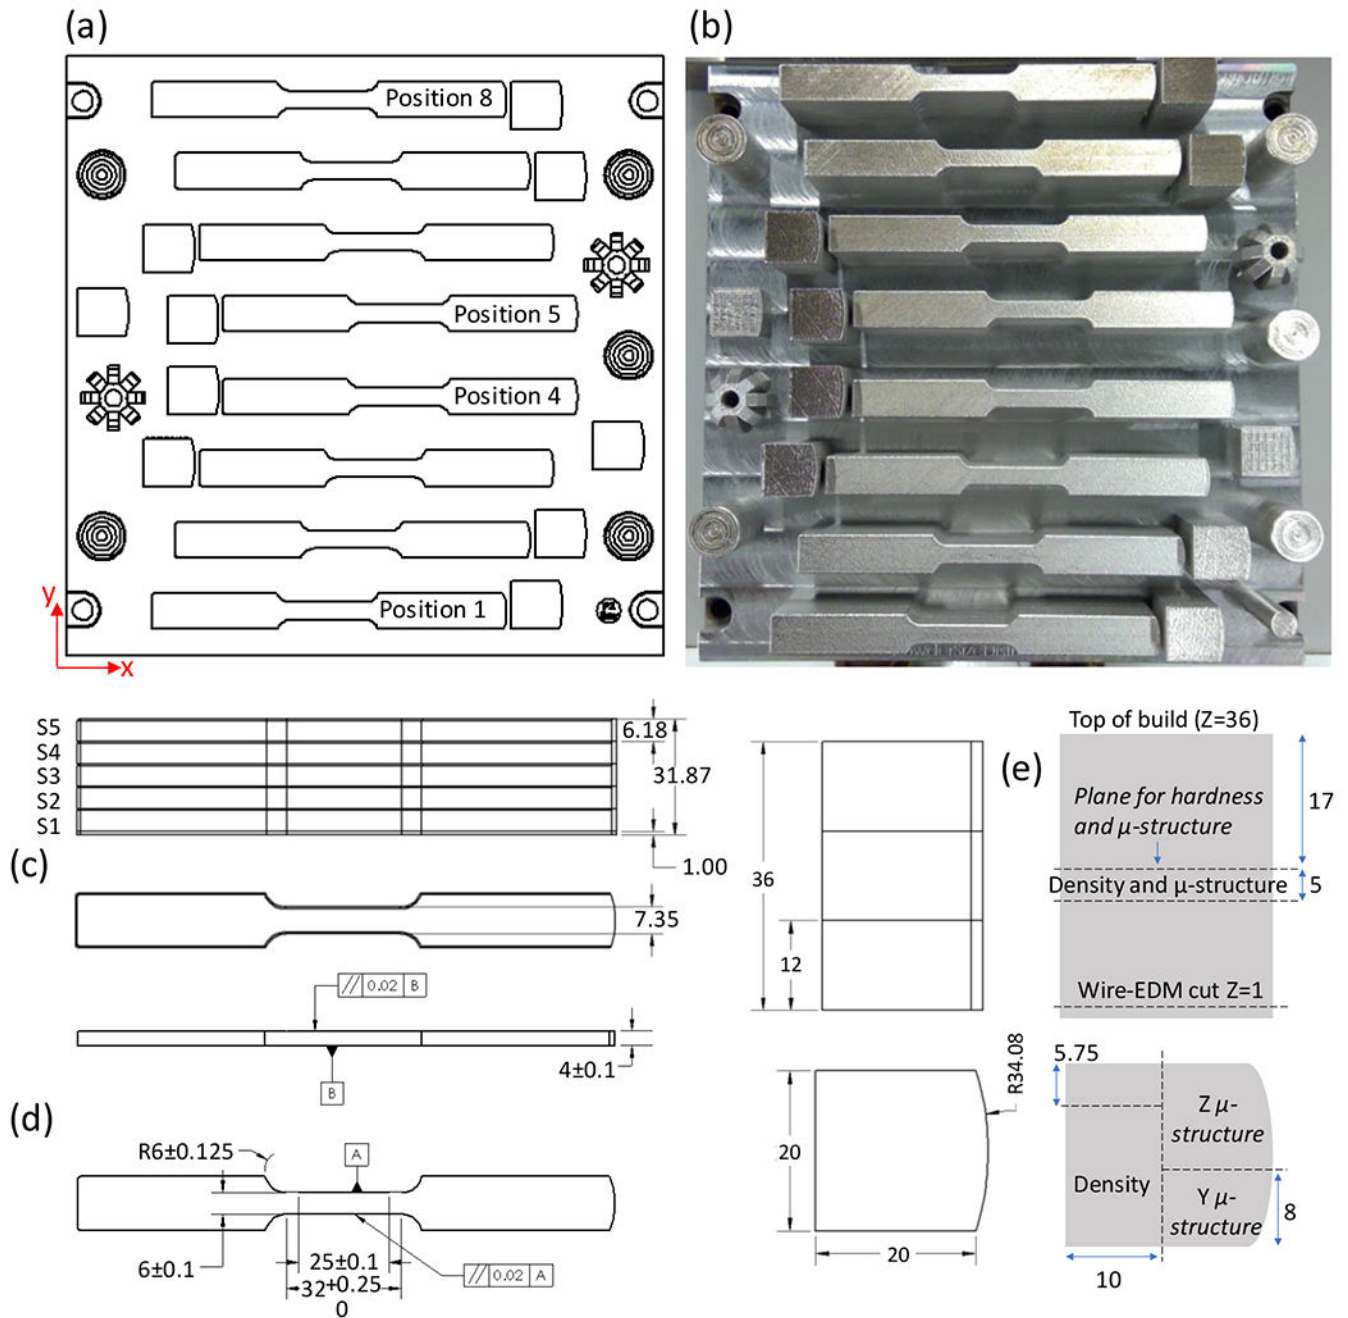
(a) build layout and (b) image of completed build. The build plate is 252 mm x 252 mm for reference. (c) stack of five oversized tensile bars, (d) machined dimensions of tensile bars, (e) stack of three witness blocks and schematic of cross-sectioning for hardness, density, and microstructure (μ -structure) characterization of the Z and Y planes. Dimensions are in millimeters.
